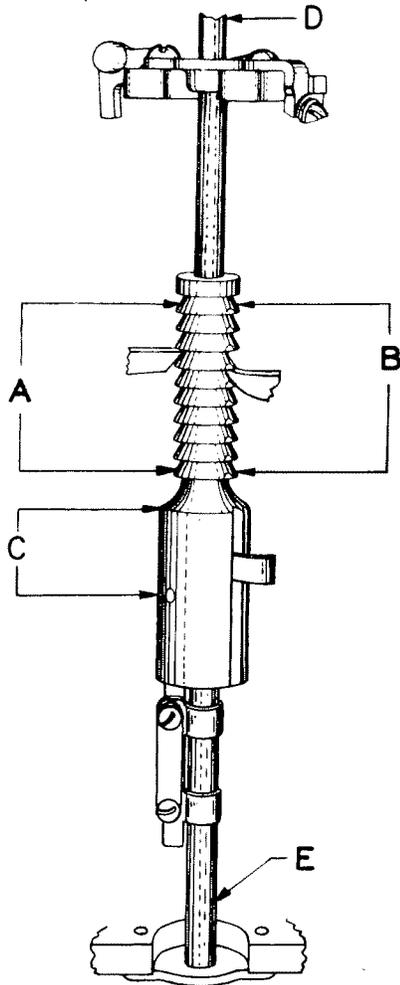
Lubrication Points for Shaft and Associated Parts of 197-Type Switches
